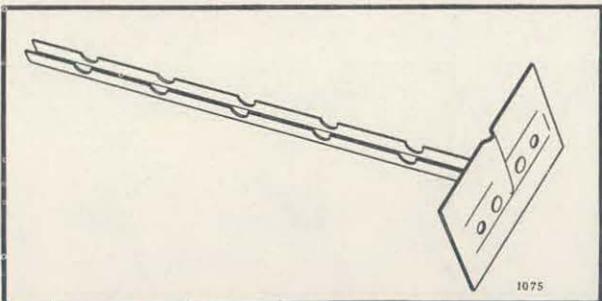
BULB HOLDER FOR MOUNTING SENSING ELEMENT.
